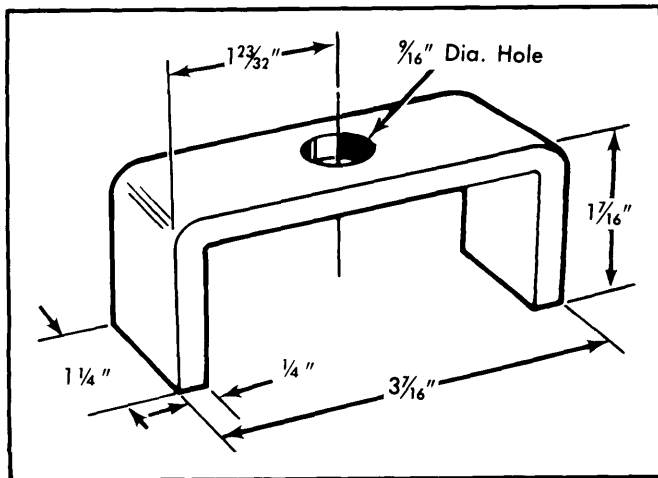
Dimensions for Making a Lock Plate Depressor Tool
